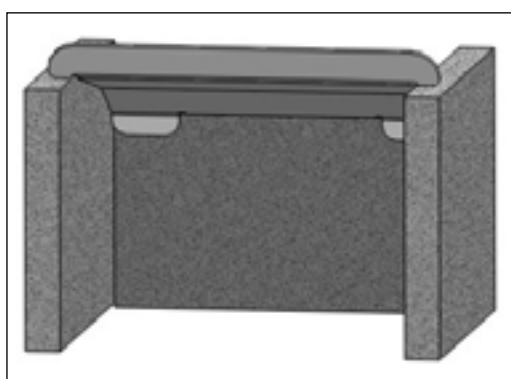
Overall View Of Liners & Throat Plate Assembly
